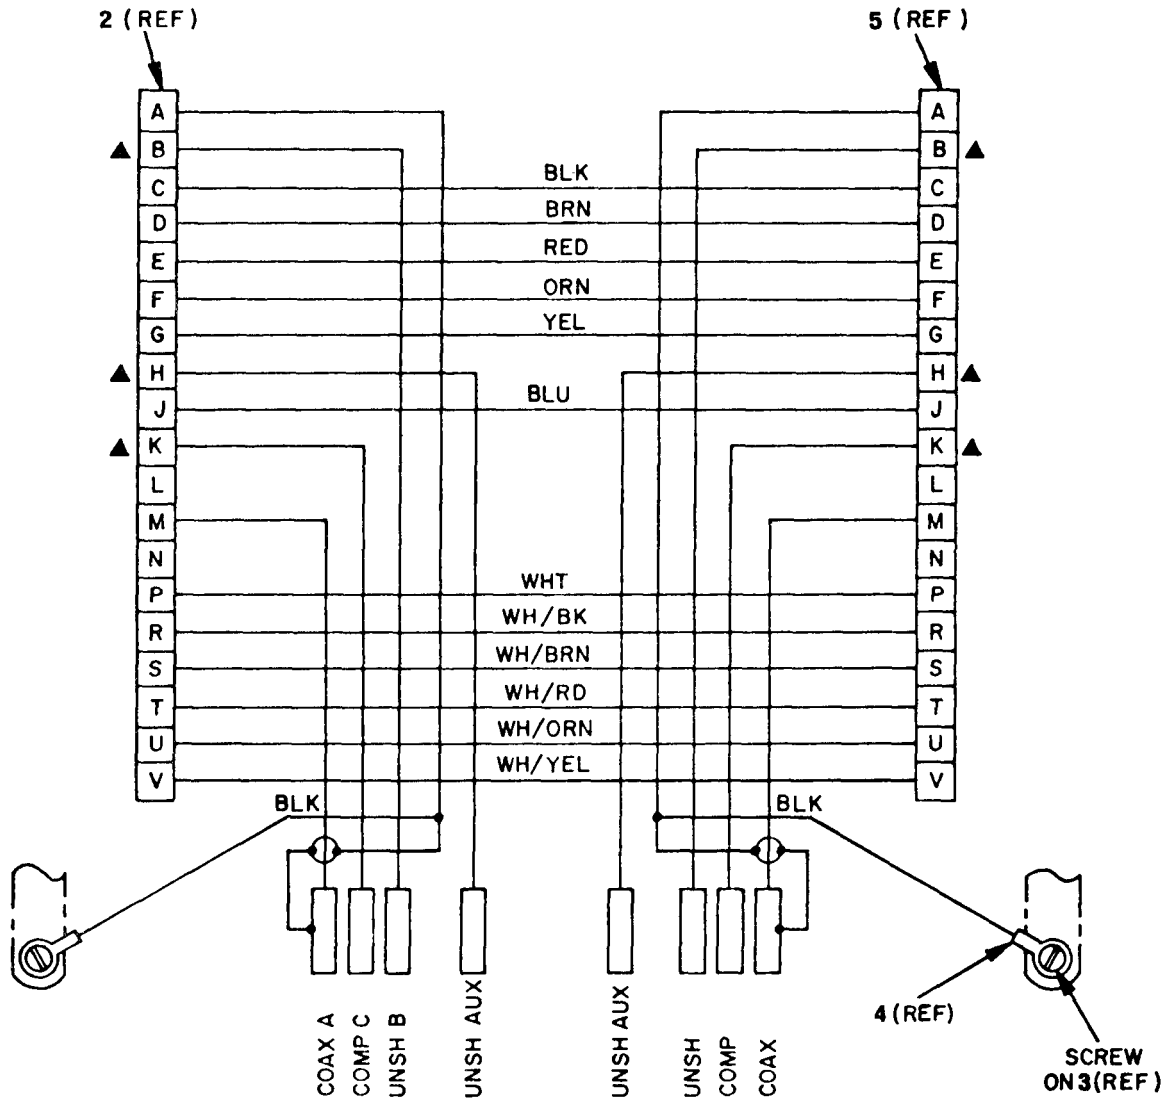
Main adapter cable assembly W4, part number 467-103-001 (sheet 2 of 2)
